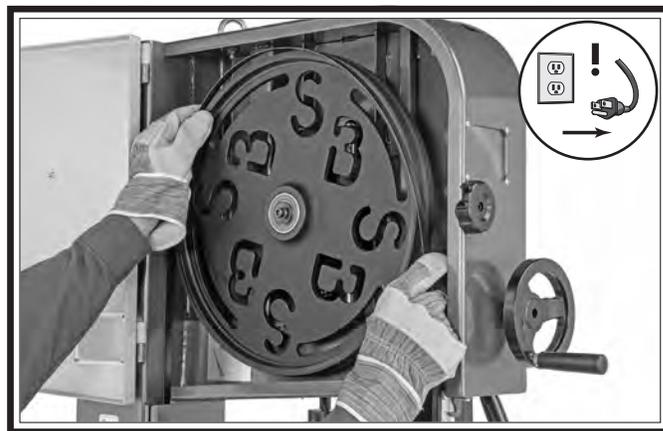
Example of removing blade and upper wheel to access blade tension lever components.
